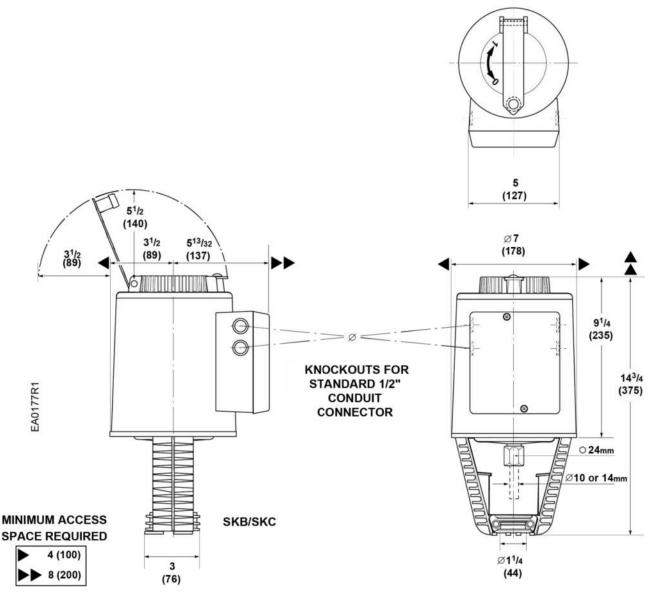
Dimensions of SKB/C in Inches (Millimeters).
